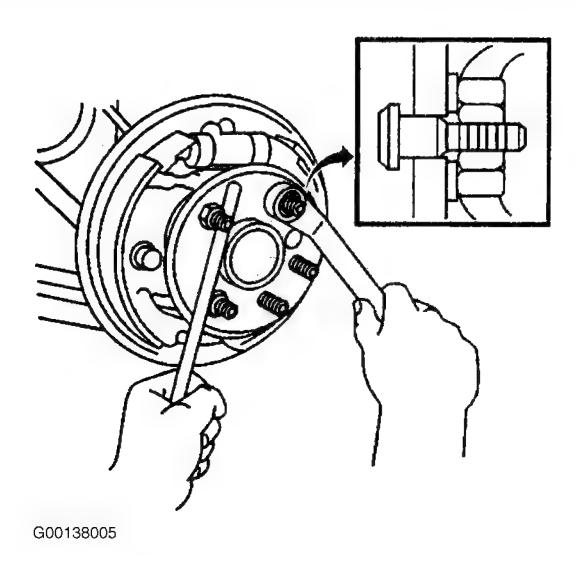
Installing Wheel Stud Into Rear Axle (Drum Brakes) Courtesy of GENERAL MOTORS CORP.
